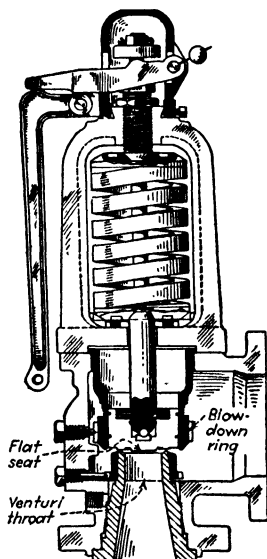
Nozzle safety valve for saturated steam. (*Crosby Steam Gage and Valve Company.*)
